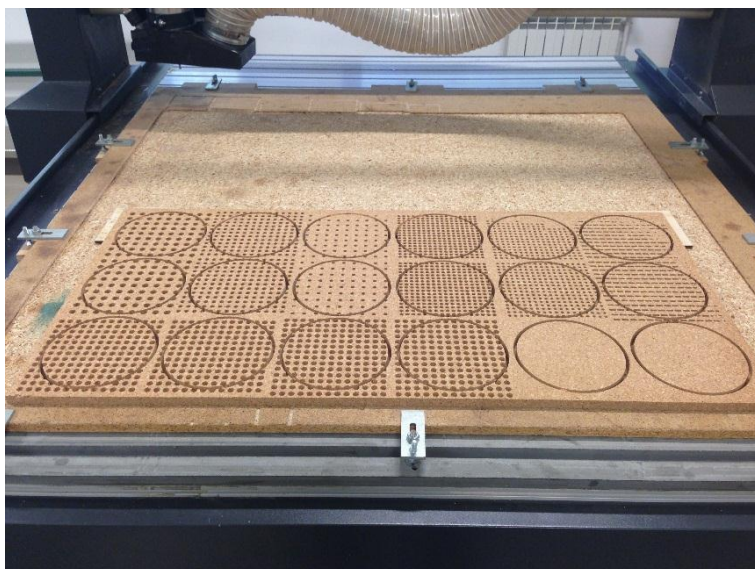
Finished Cork Plate with drilling patterns and profile cuts
